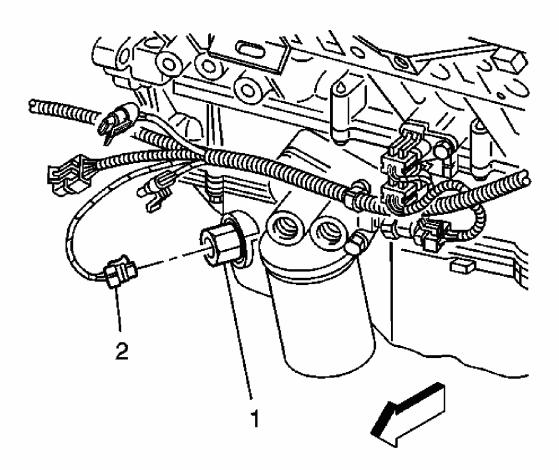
View of Engine Oil Level Sensor & Electrical Connector Courtesy of GENERAL MOTORS CORP.
